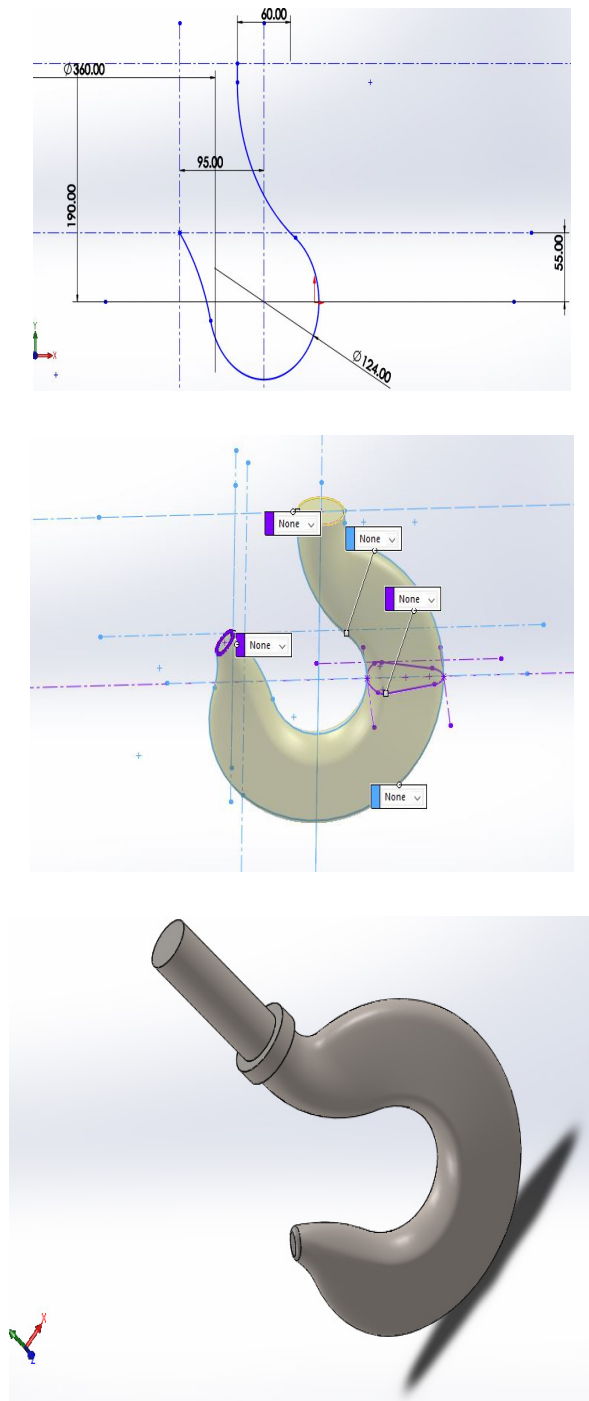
Standard Trapezoidal Cross-Section Crane Hook Model.
